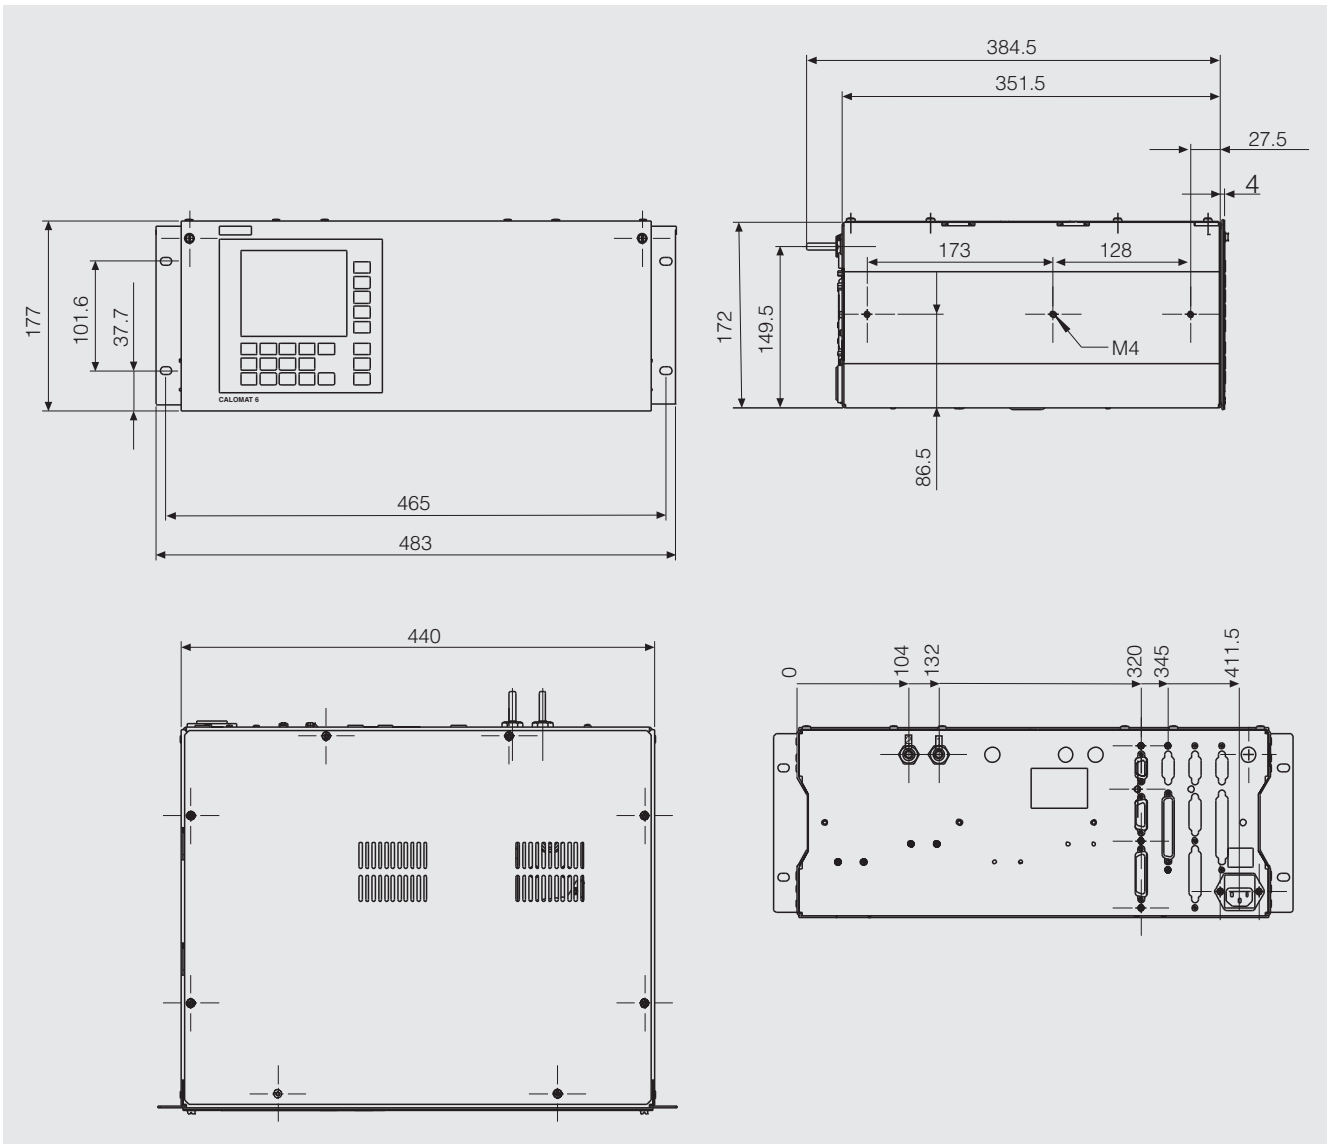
CALOMAT 6, 19" unit, dimensions in mm
